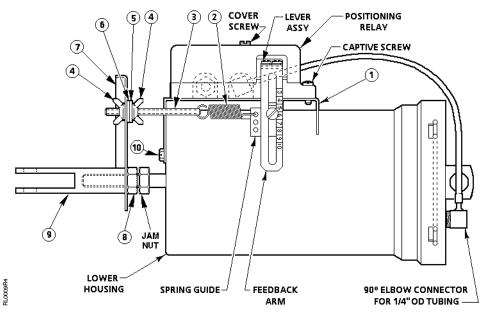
Positioning Relay Mounting Kit 147-314 on the No. 4 Damper Actuator.
